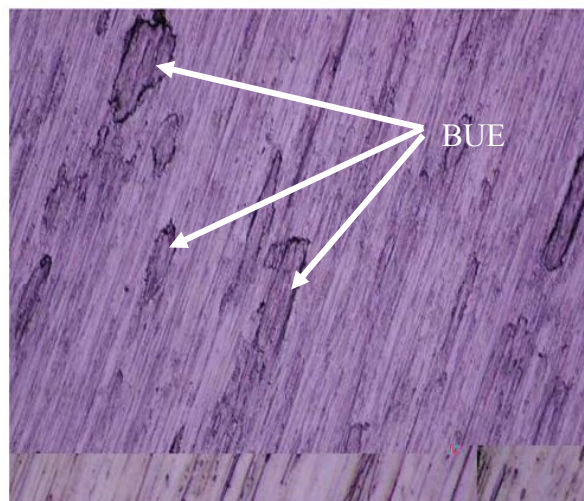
Optical micrograph showing the deposition of BUE's on the machined surface in dry cutting [85]
